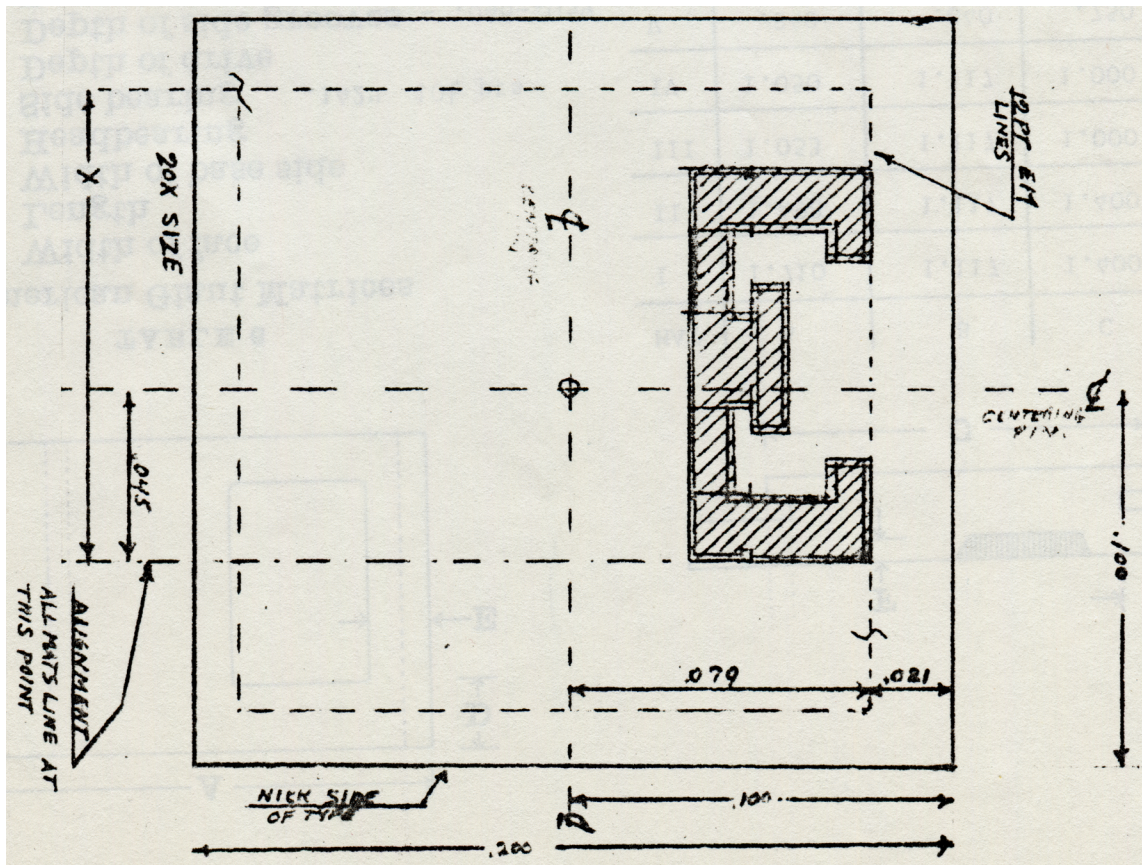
Lanston Cellular Matrix Face Dimensions, Drawing (Duensing)
